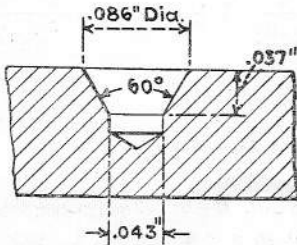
DETAILS OF STANDARD STRAIN GAGE HOLE.
